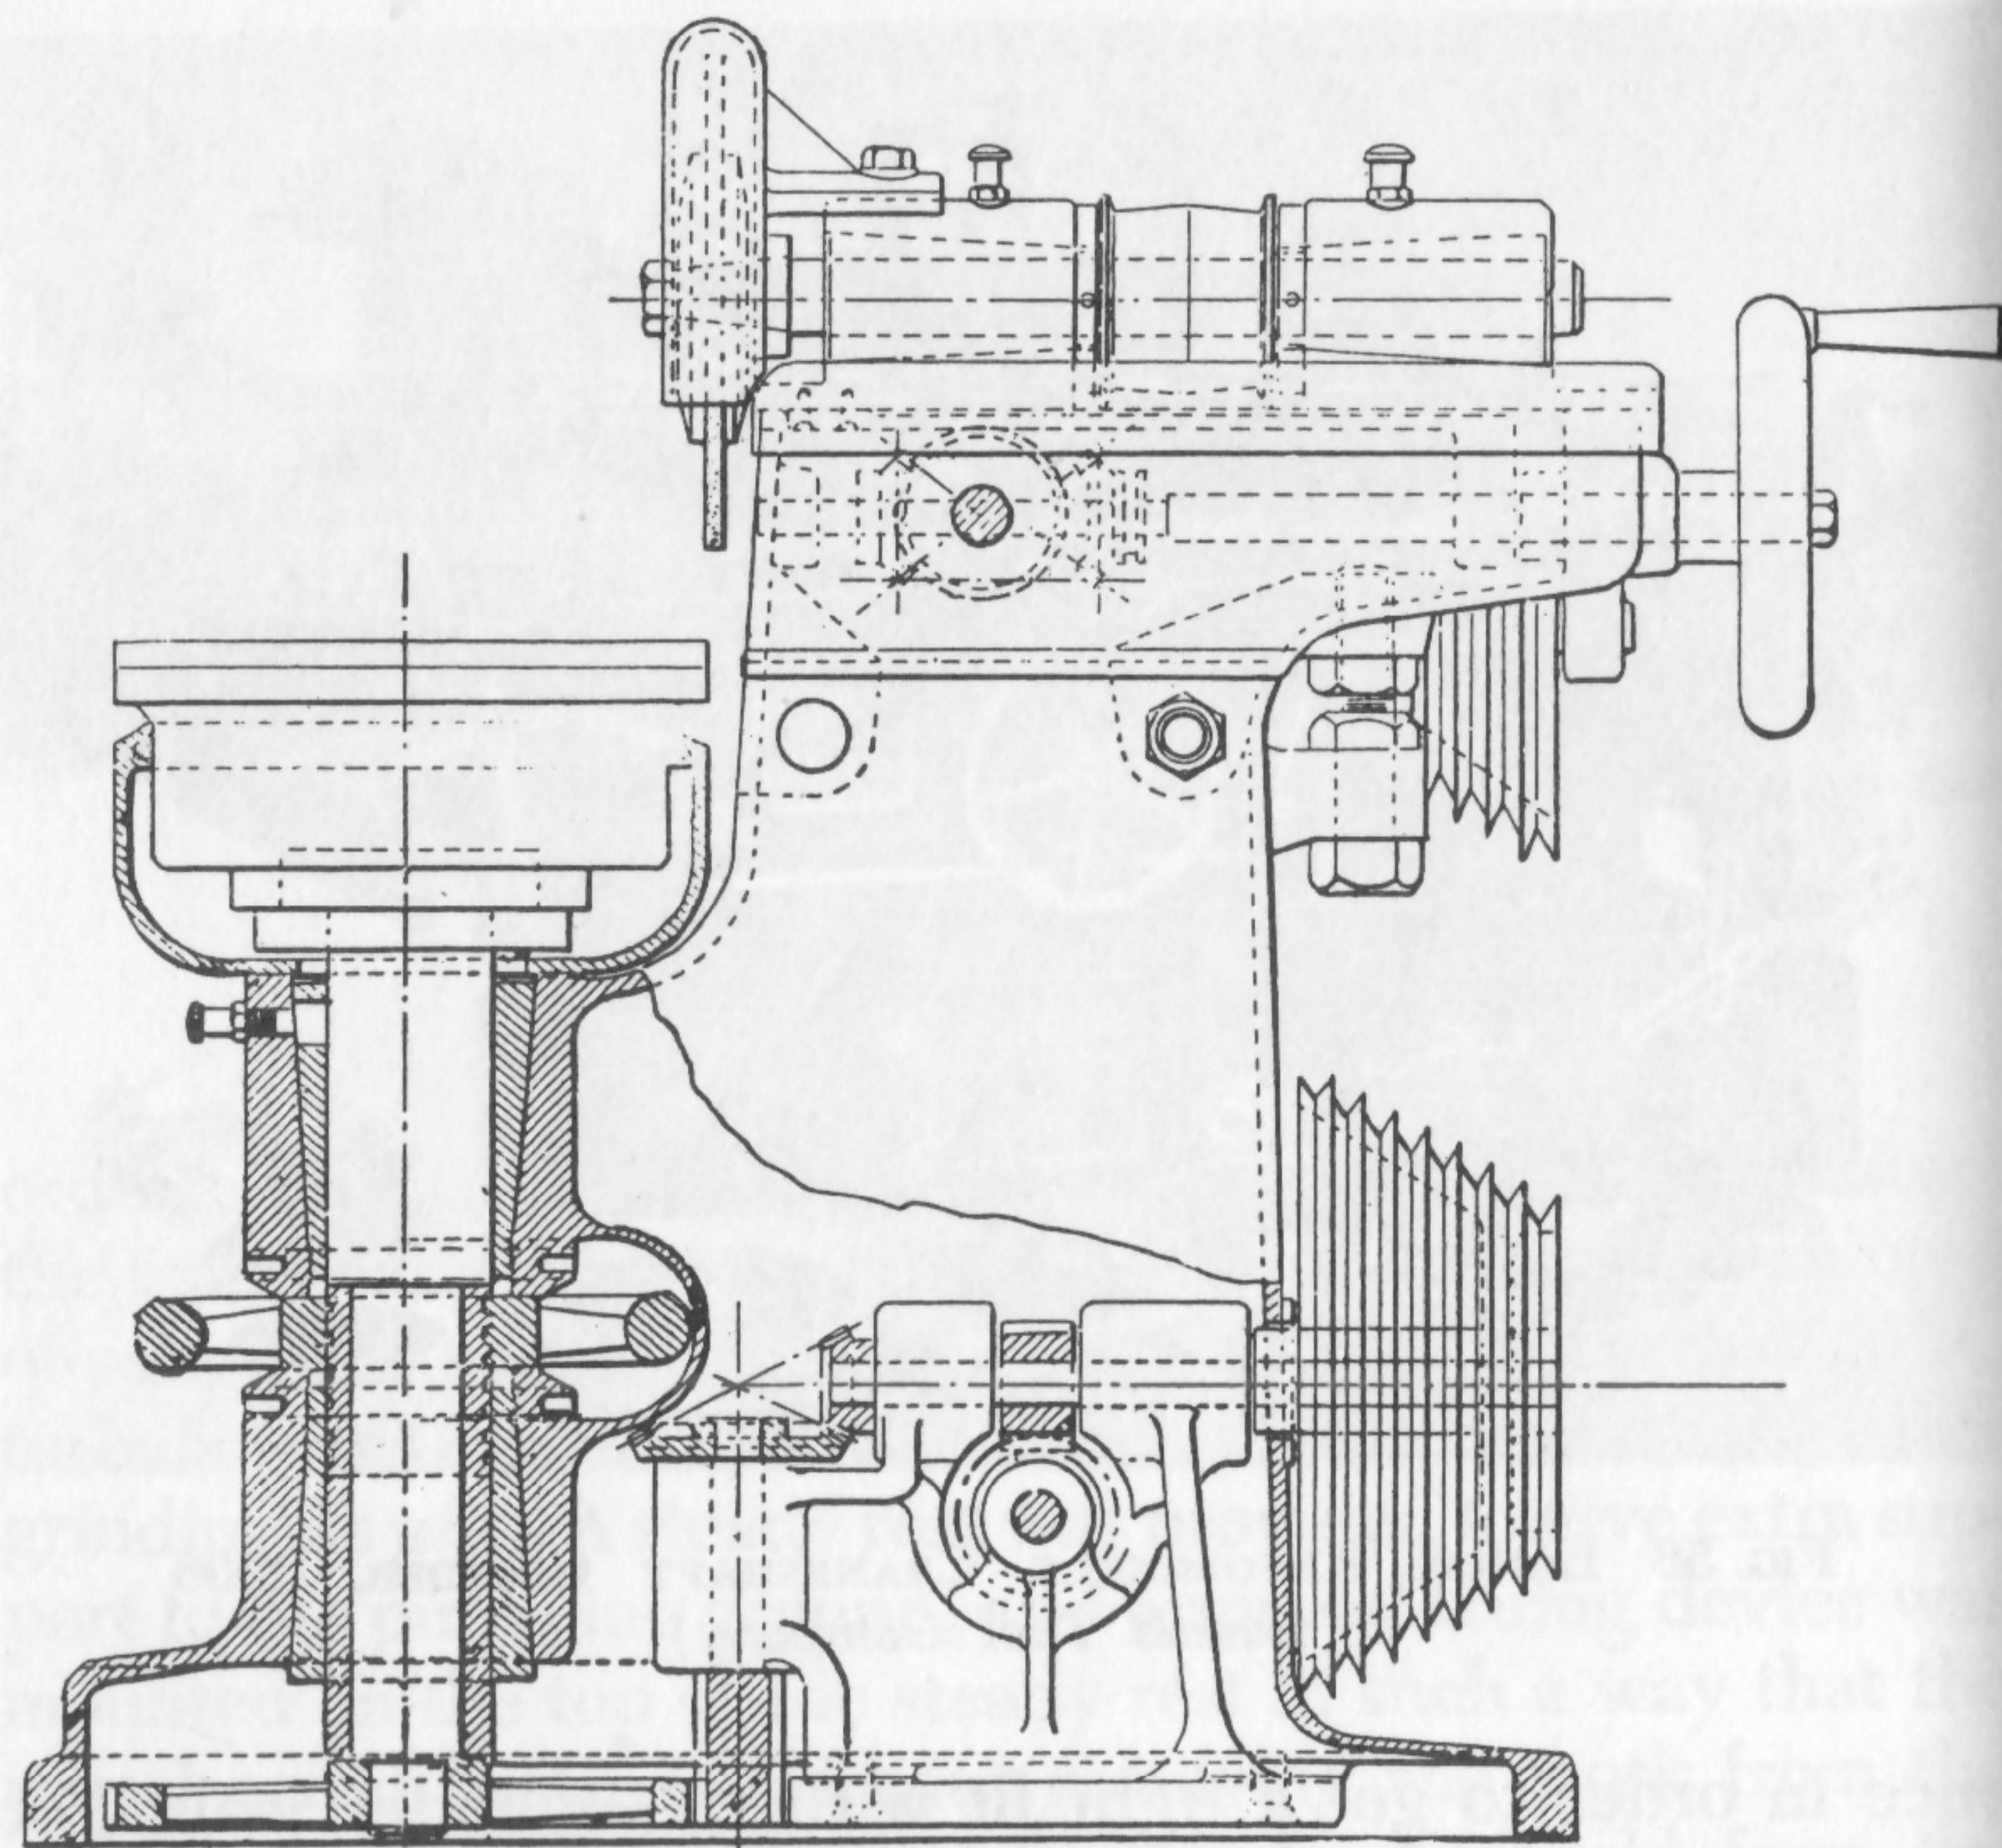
HEALD PISTON RING GRINDER, 1904 (*American Machinist*)
